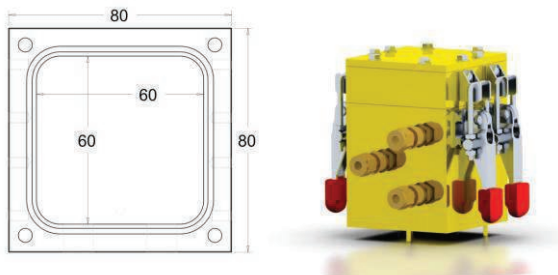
The test chamber prototype. Left: Technical drawing. The inner chamber exhibits a depth of 70 mm. Right: CAD view of the test chamber.
